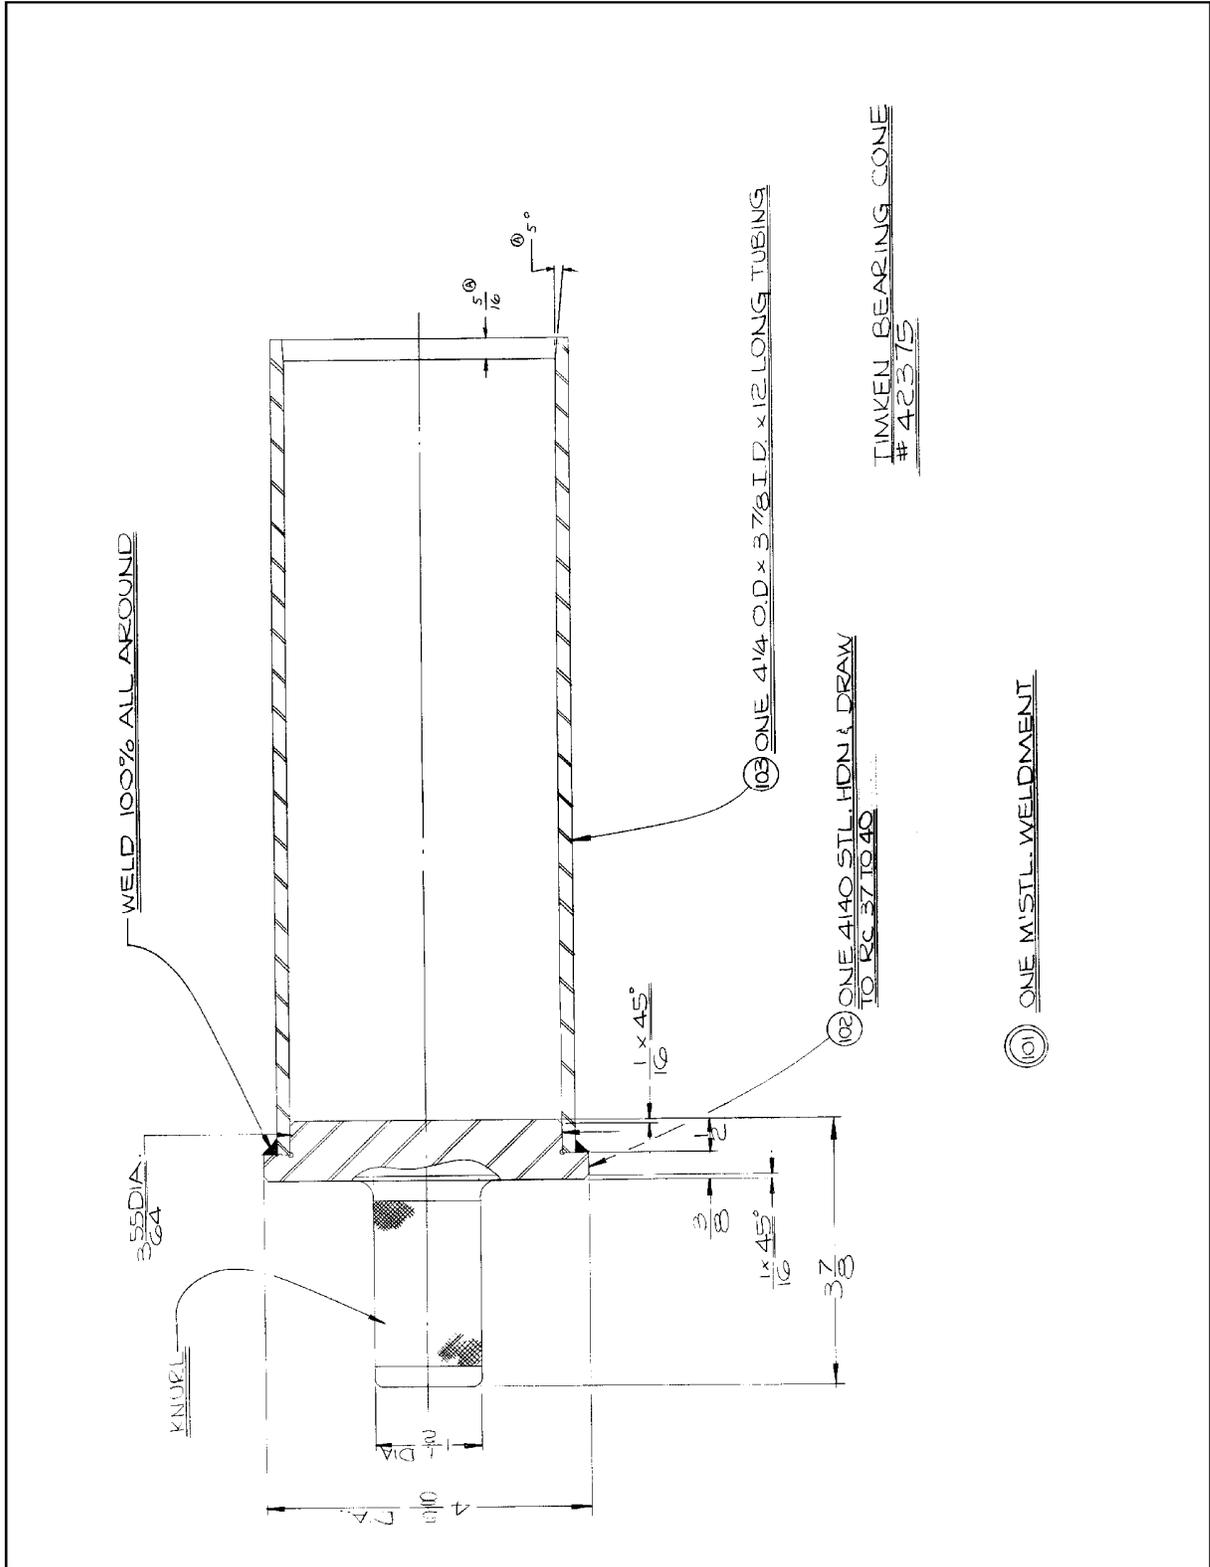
Assembly Tools - Bearing Cone Pressing - "B" Bearing
